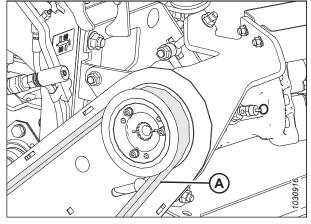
Drive Pulley - Conditioner Drive Motor
